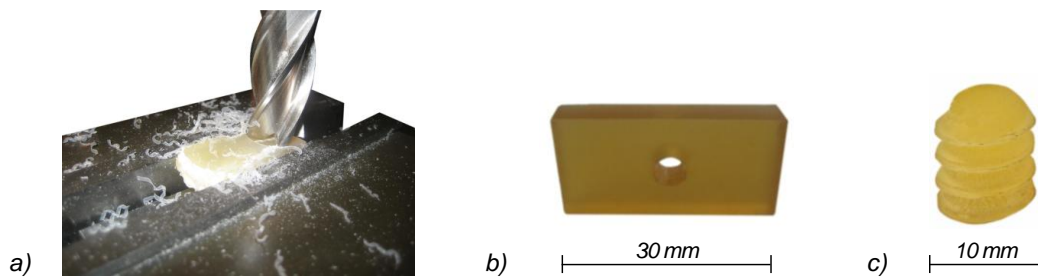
Example of 3D chitosan specimens: a) specimen being shaped in a milling machine; b) flat plate with a hole; c) screw-shaped specimen.
